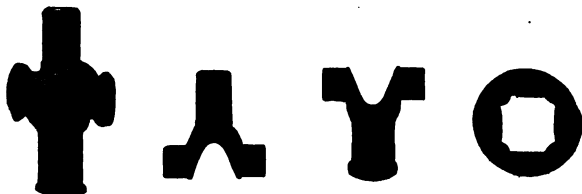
Universal Joint; Completely Assembled, also Showing Parts.
